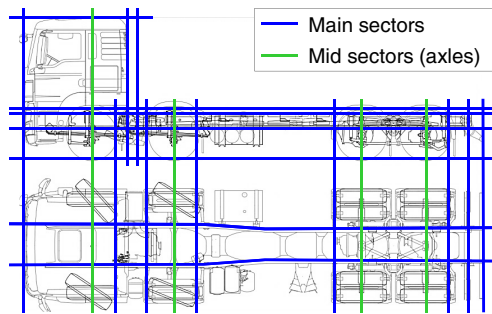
Packaging spaces visualized by superposing qualitative grid and technical drawings in [12, p. 10]
